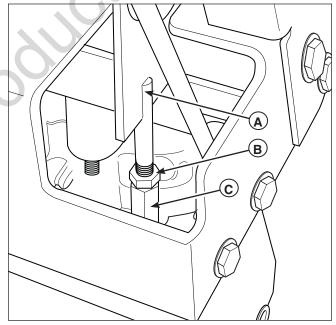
Adjusting the Speed of the Faster Wheel (RH side shown)
